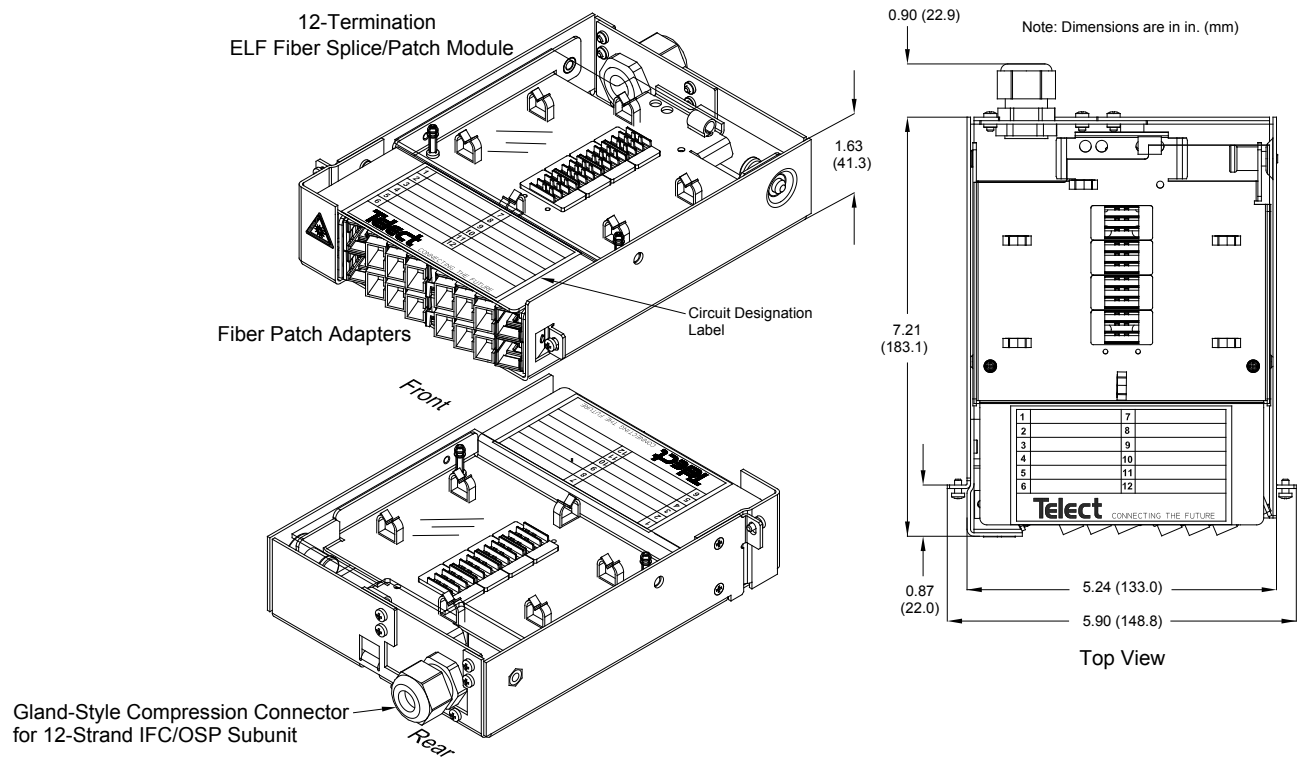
Model Series ELF-SP12-XXPT Parts & Dimensions
